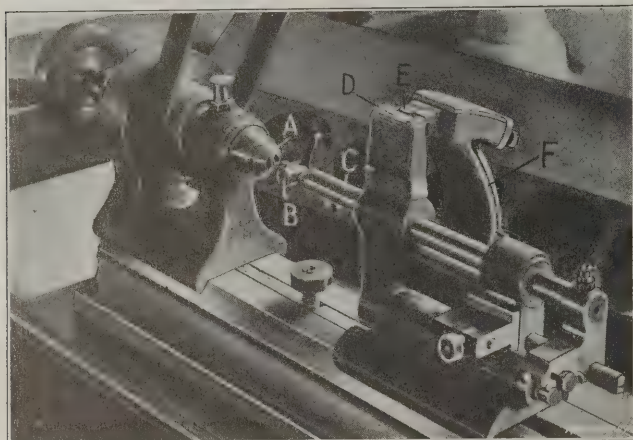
Jewel "Letting-in" Machine and Caliper Rest for governing Diameter of Hole for Jewel
